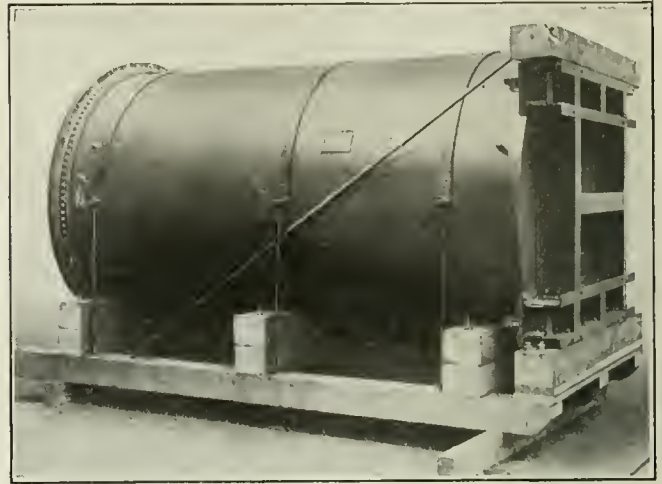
TRANSFORMER IN CRADLE READY TO SHIP
